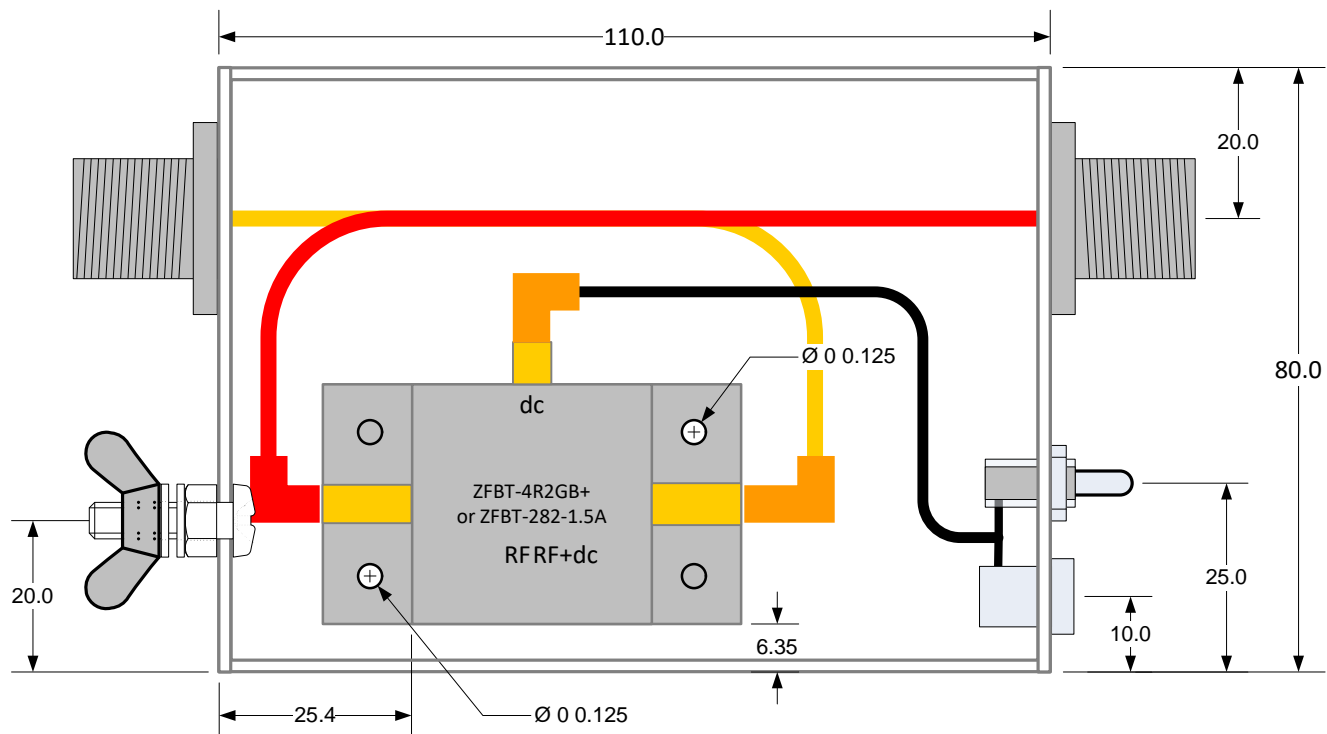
~ Enclosure plan view as seen from the underside. It shows the layout of the bias-tee module and RF cabling (this drawing serves as a template for drilling the bias-tee bracket mounting holes and is taped to the outside of the enclosure prior to center punching and drilling). The bias-tee is offset to provide clearance for the power components on the front panel and for the RF connectors on the front and rear panels.
